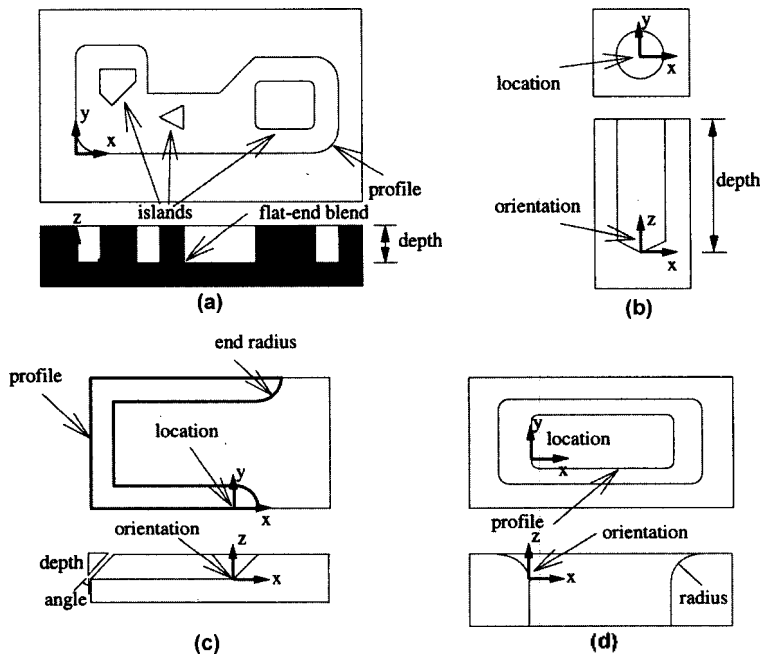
Machining features: (a) pocket, (b) hole, (c) chamfer, and (d) round
